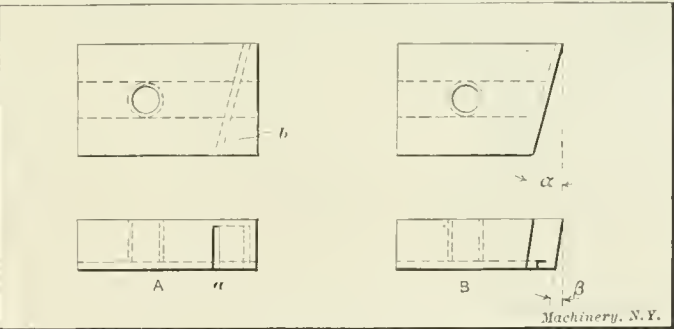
Type of Shaving Tool used in the Shaving-tool Holder shown in Fig. 24
